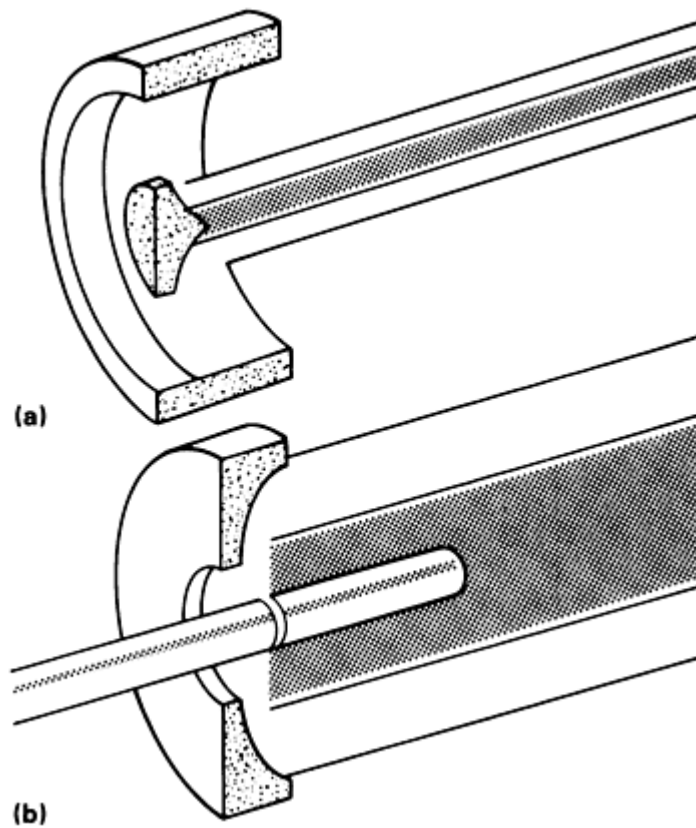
Toric mirrors for treating cylinders. (a) Outer surface of cylinders. (b) Inner surface of hollow cylinder
